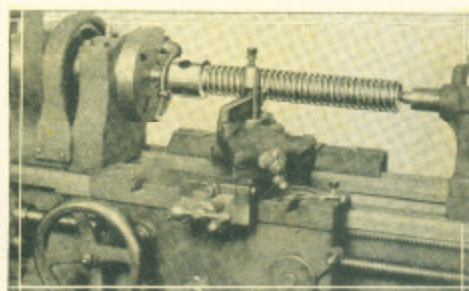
Cutting a Square Thread, in a New Model South Bend Lathe.
